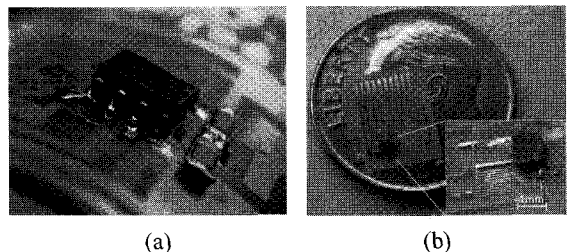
Photos of (a) surface mount IC and components and (b) bare IC silicon die flip chip soldered to flexible printed circuit board<sup>4</sup>
